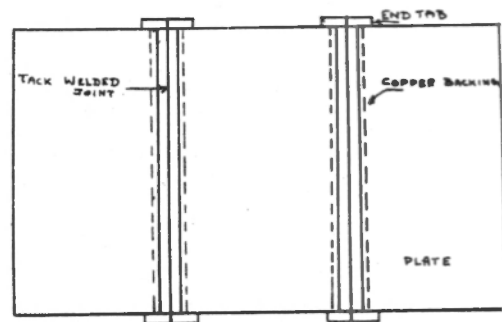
SET UP FOR ONE SIDE FCB WELDING
